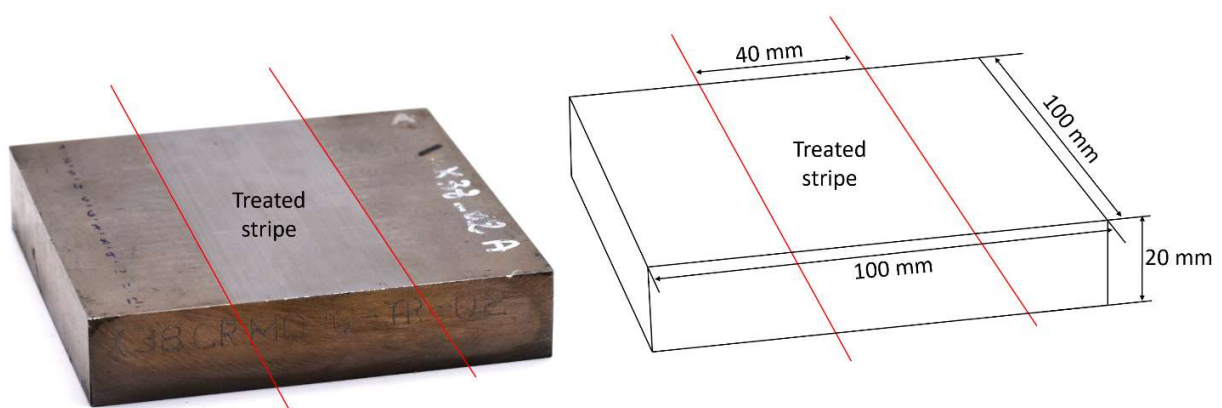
Tested specimen, dimensions, and identification of the treated stripe.
